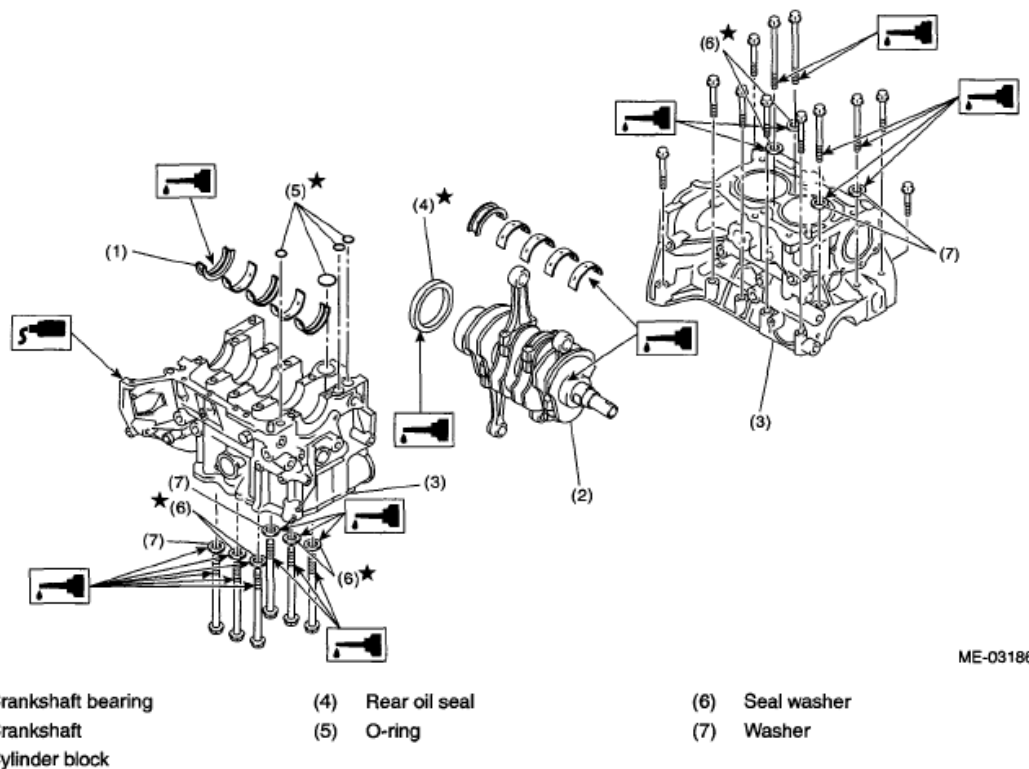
Identifying Cylinder Block, Crankshaft, Rear Oil Seal And Seal Washer
